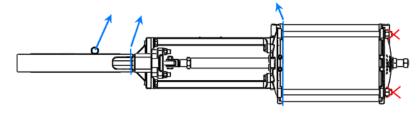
Knife Gate Valve with Pneumatic Cylinder Actuator, Horizontal Lifting
